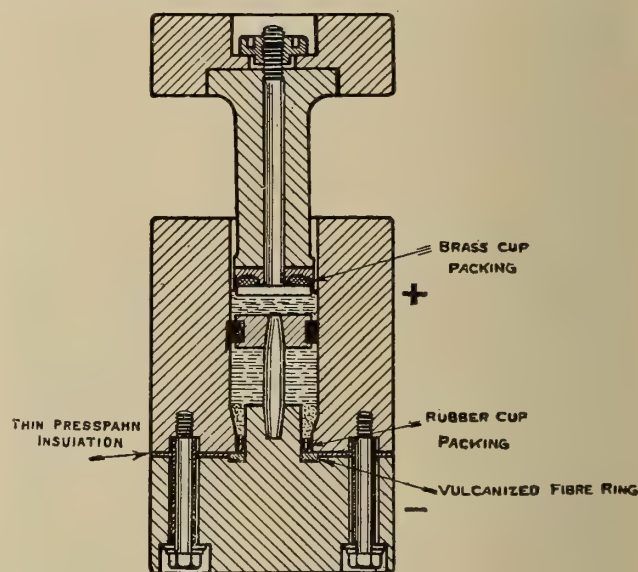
CONTAINER ADAPTED CHIEFLY FOR COMPRESSING LIQUIDS
